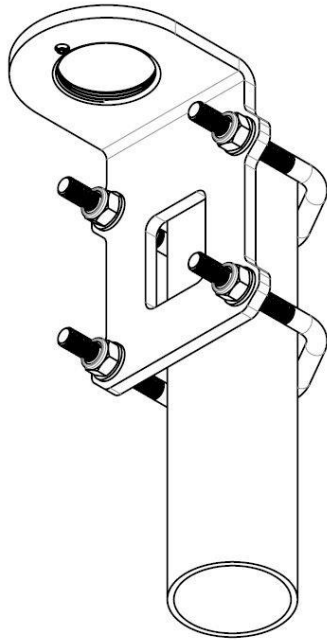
Bracket Mount (1.5" to 2.5" tube), Antenna Unit – vertical tube mount.
